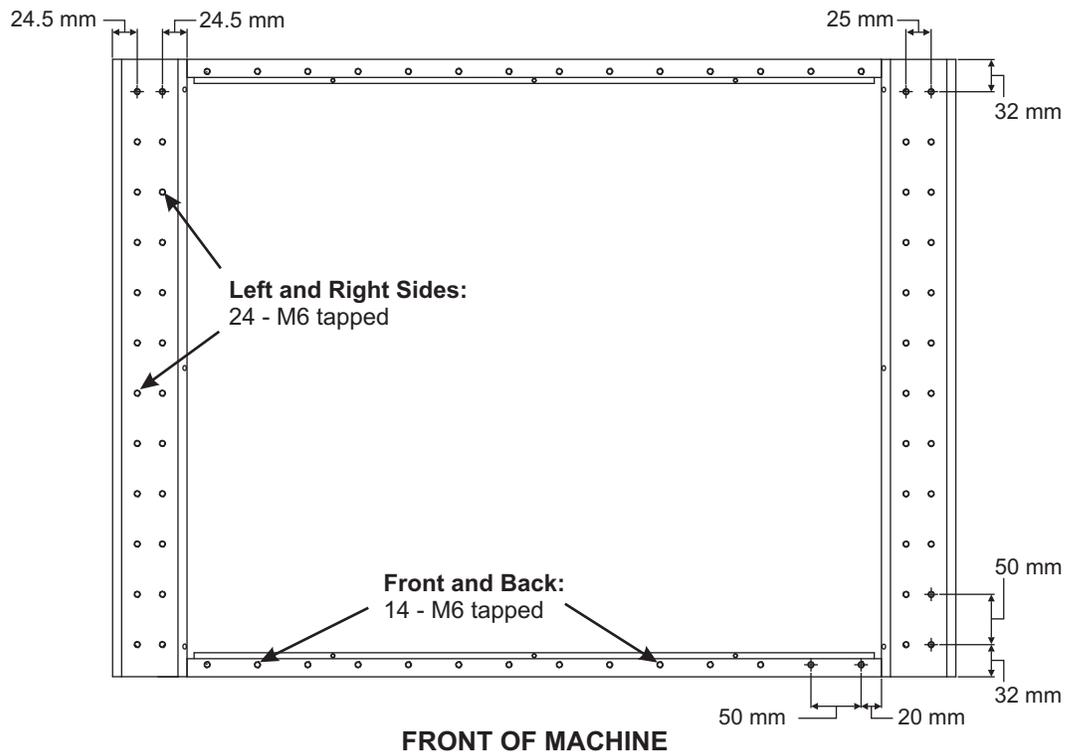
Benchmark 450 Stage Fixturing Holes
